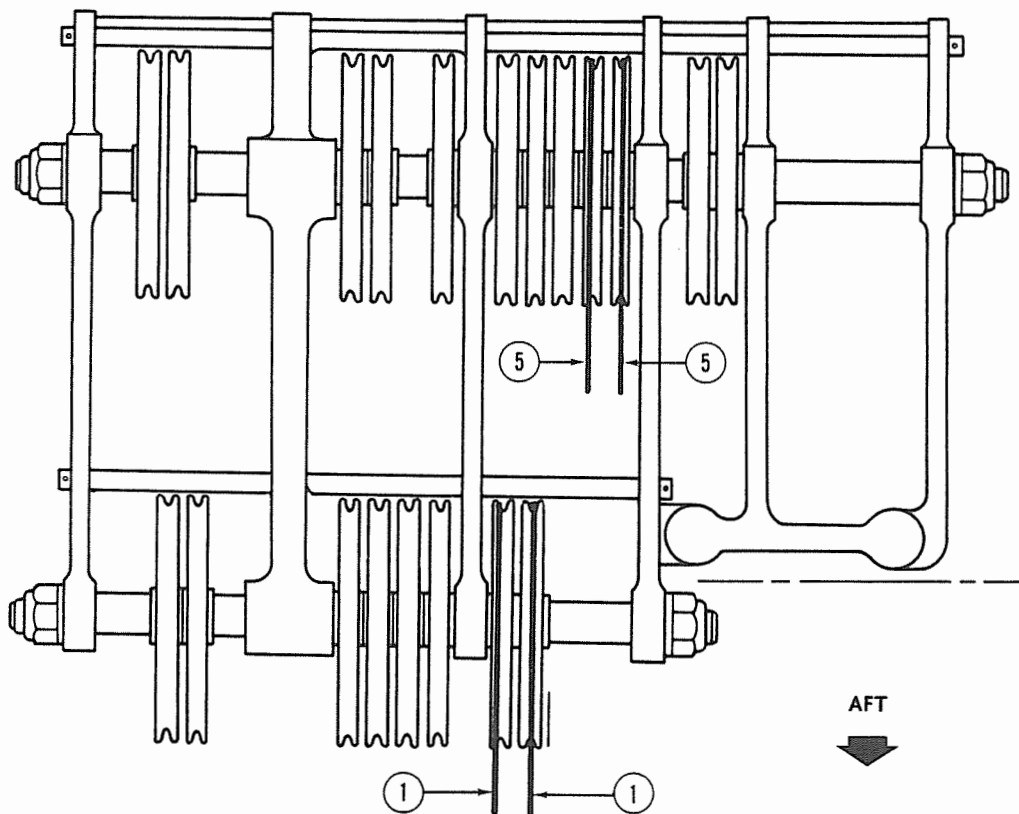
(Sheet 1 of 8 Sheets). Propeller Pitch Control System - Key Drawing
